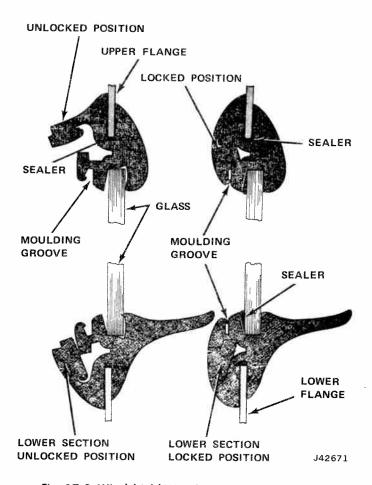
Windshield Weatherstrip Cross-section - Moulding Removed
